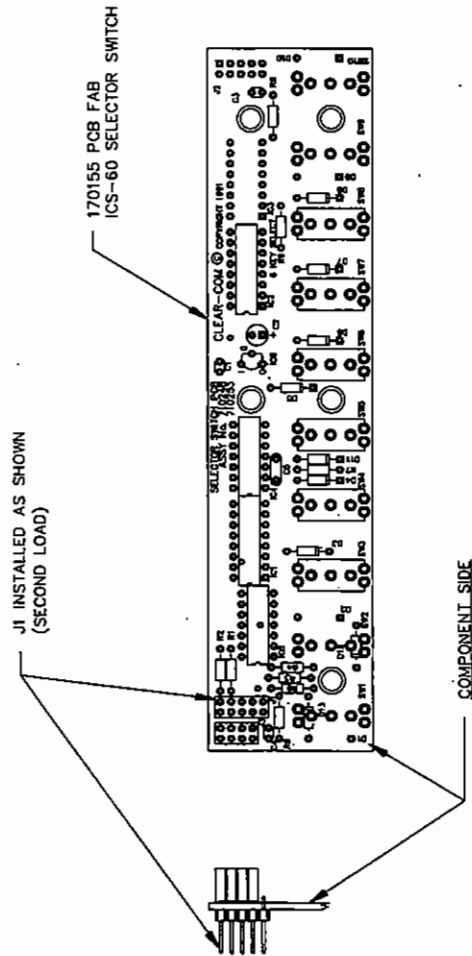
Assembly drawing - ICS-62 Selector Switch PCB Rev. A
